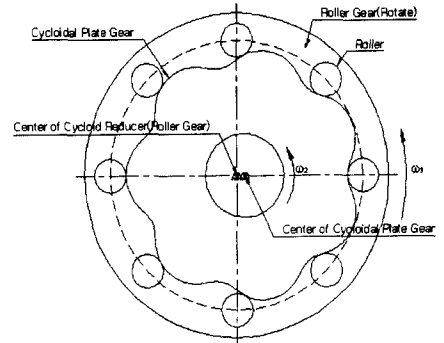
Shape of rotating outer-ring type cycloid reducer
